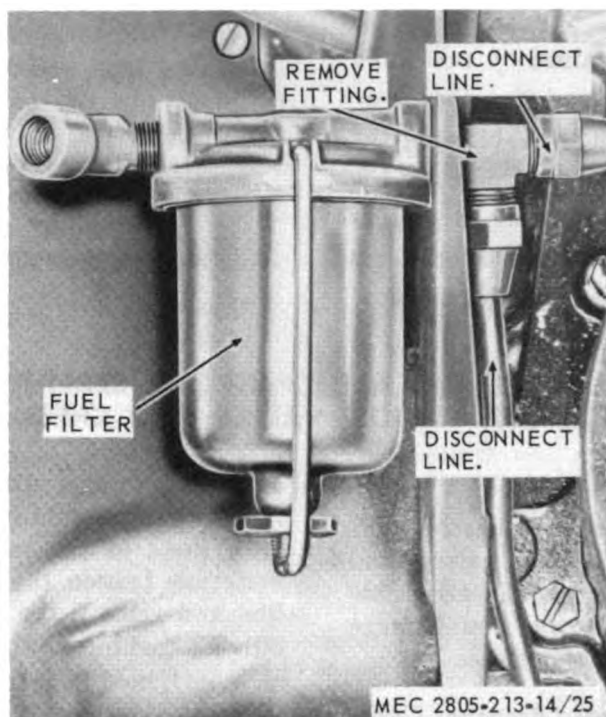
Fuel filter, removal and installation (Model AO42-KM).
